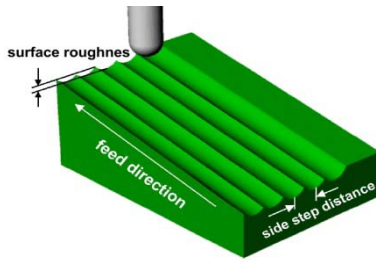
The maximum surface roughness in the machining with ball end mill [6]
